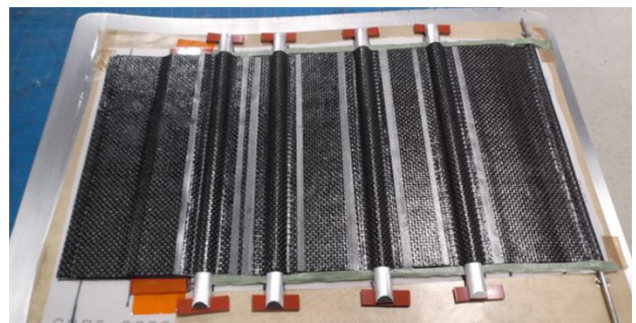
Composite layup of the integrated flexible skin, including stiffeners and their attachment to the mold. The ends of the low-speed shaped aluminum mold used to impart the shape to the skin, are also visible.
